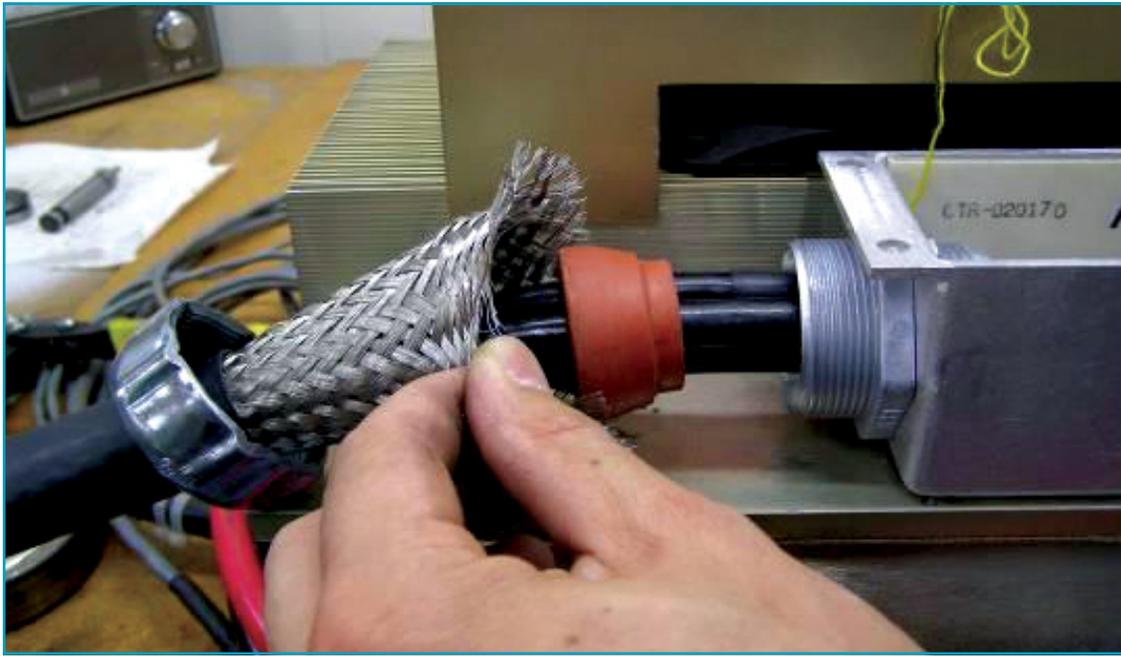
DMOC445 Motor Power Cable Entrance Fitting
